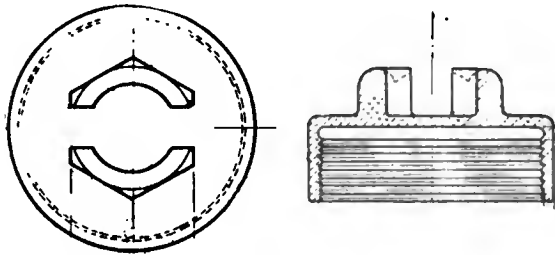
Plan and sectional views of tank filler cap, illustrating special nut.
